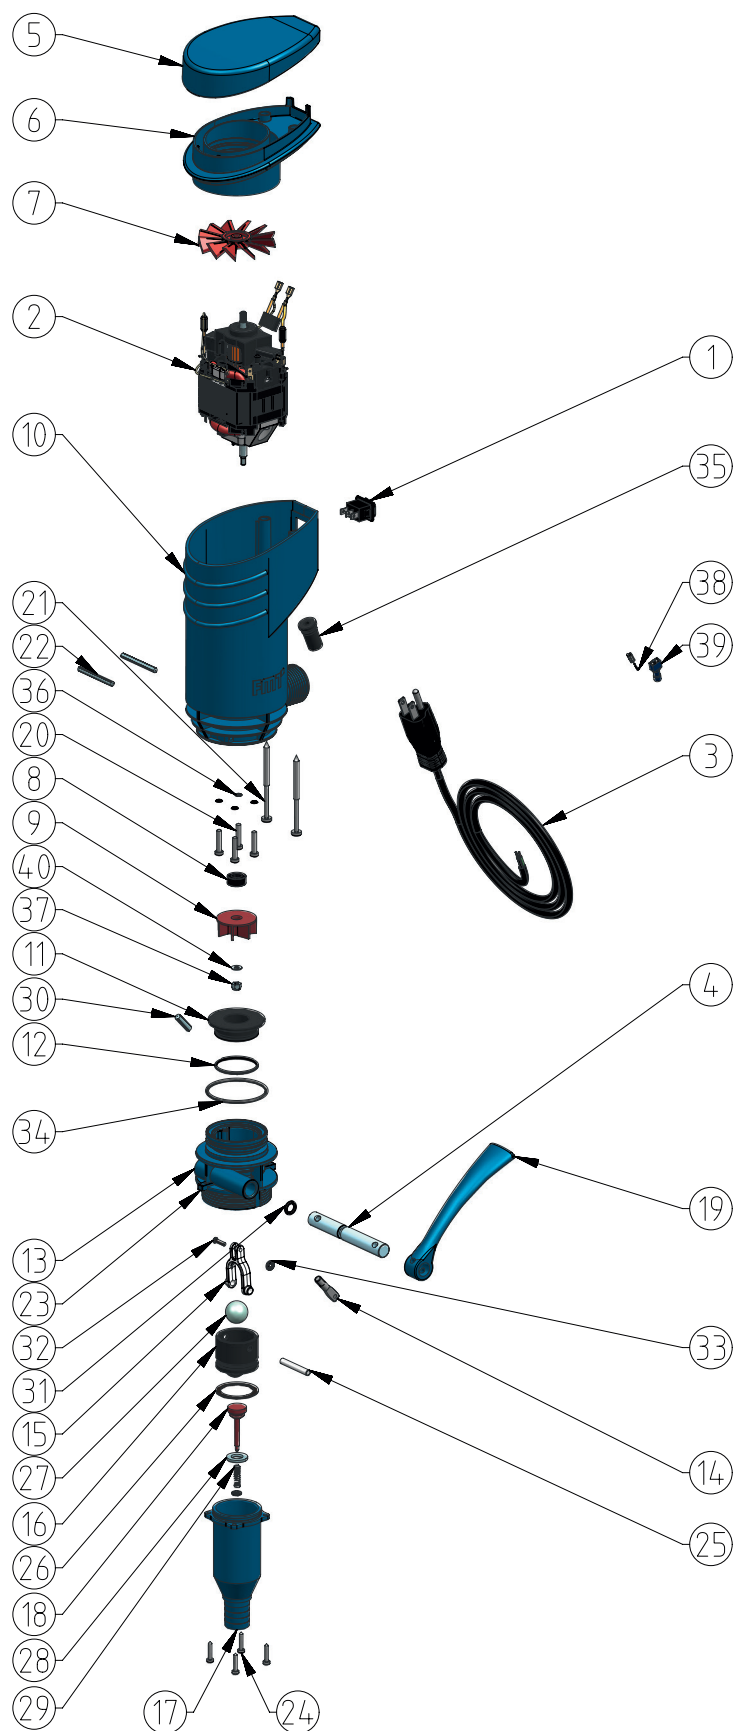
Exploded view of the PREMAxx DEF axial gear pump 120 V
